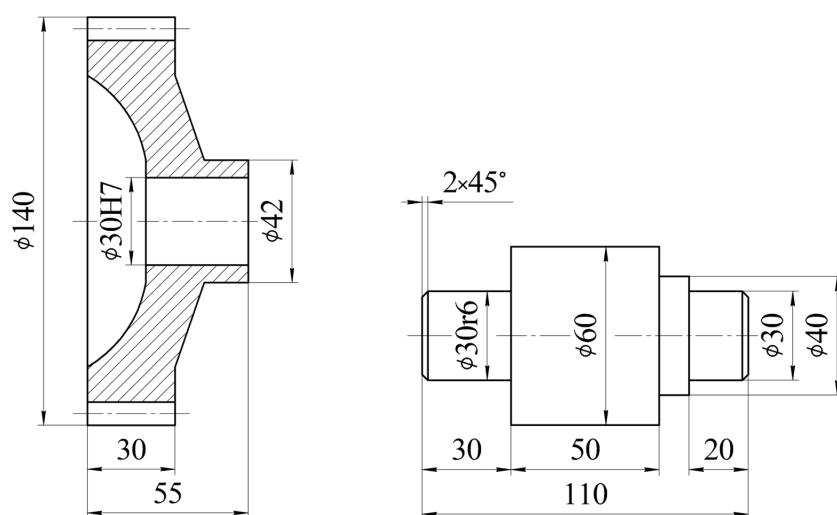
Full-scale sample of the bushing and shaft (bore diameter 30 mm)
